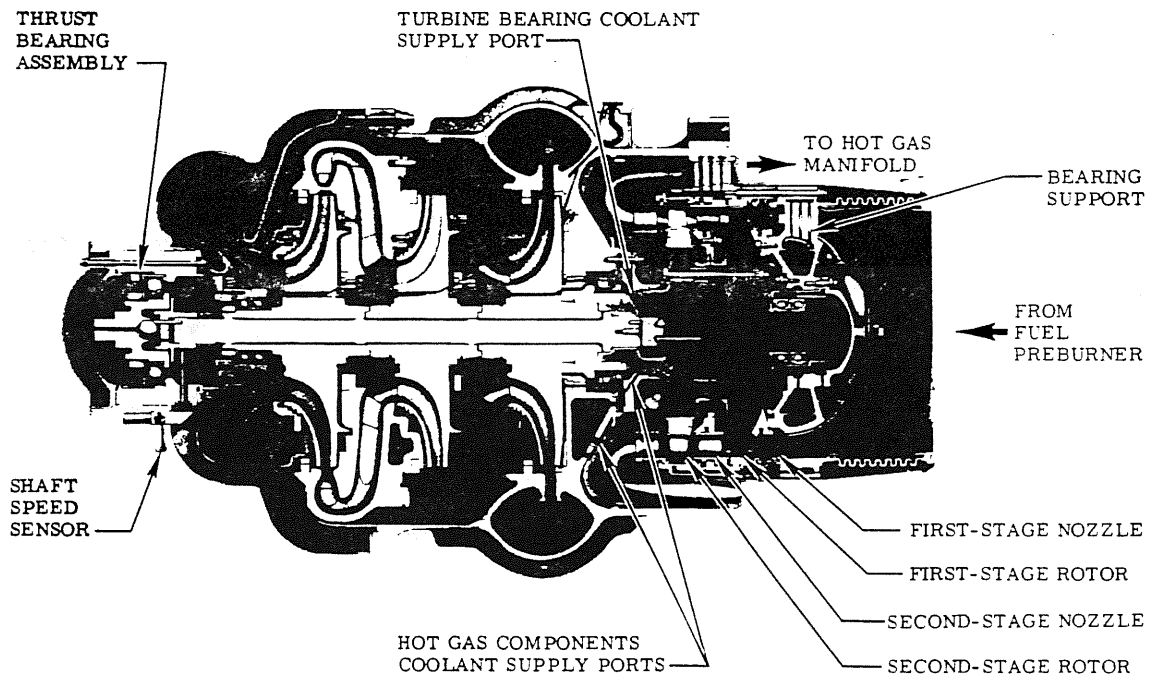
High-pressure fuel turbopump turbine.
